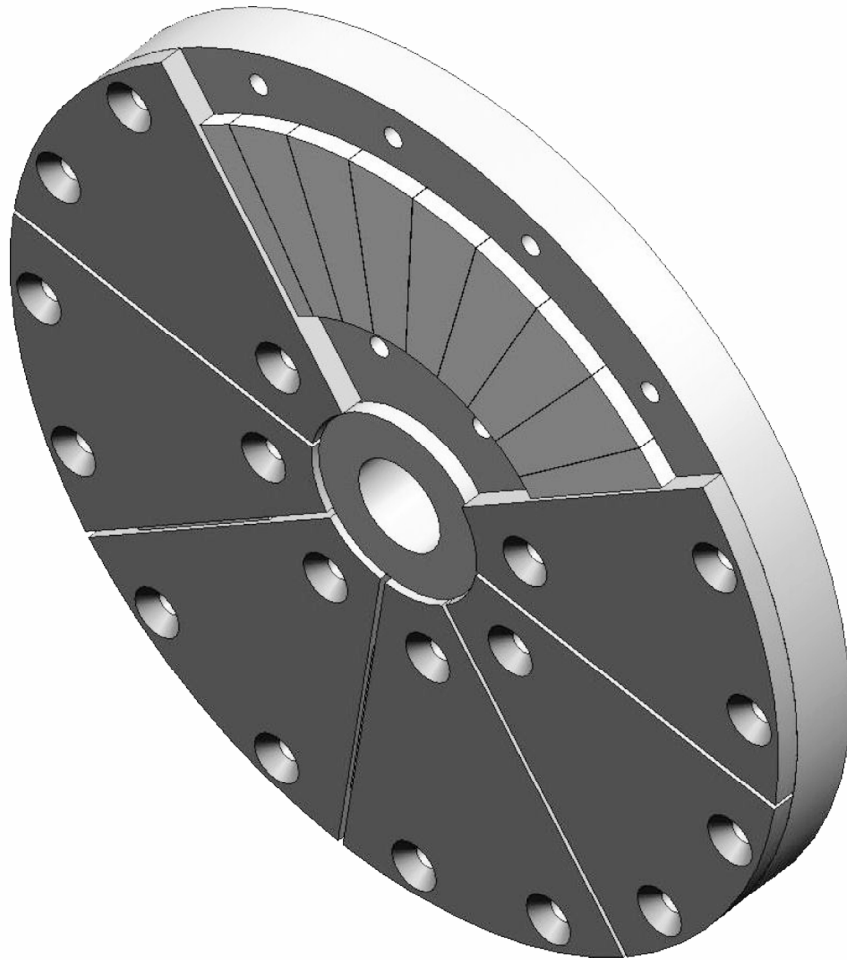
Internal view of axial Halbach magnetic bearing rotor.
